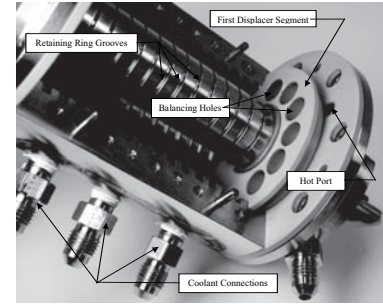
Open Displacer Housing Showing Cold Workspace and Partially Assembled Rotary Displacer
